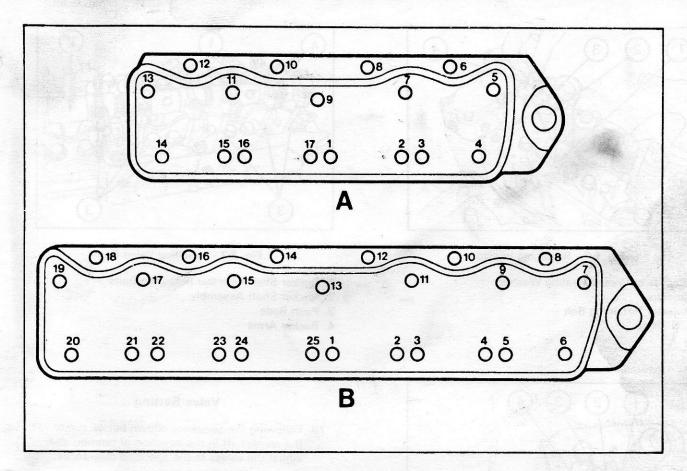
Cylinder Head Bolt Tightening Sequence
